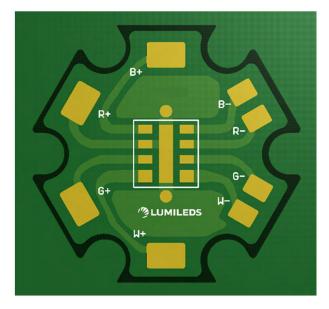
Example PCB footprint design for LUXEON 5052 RGBW.
